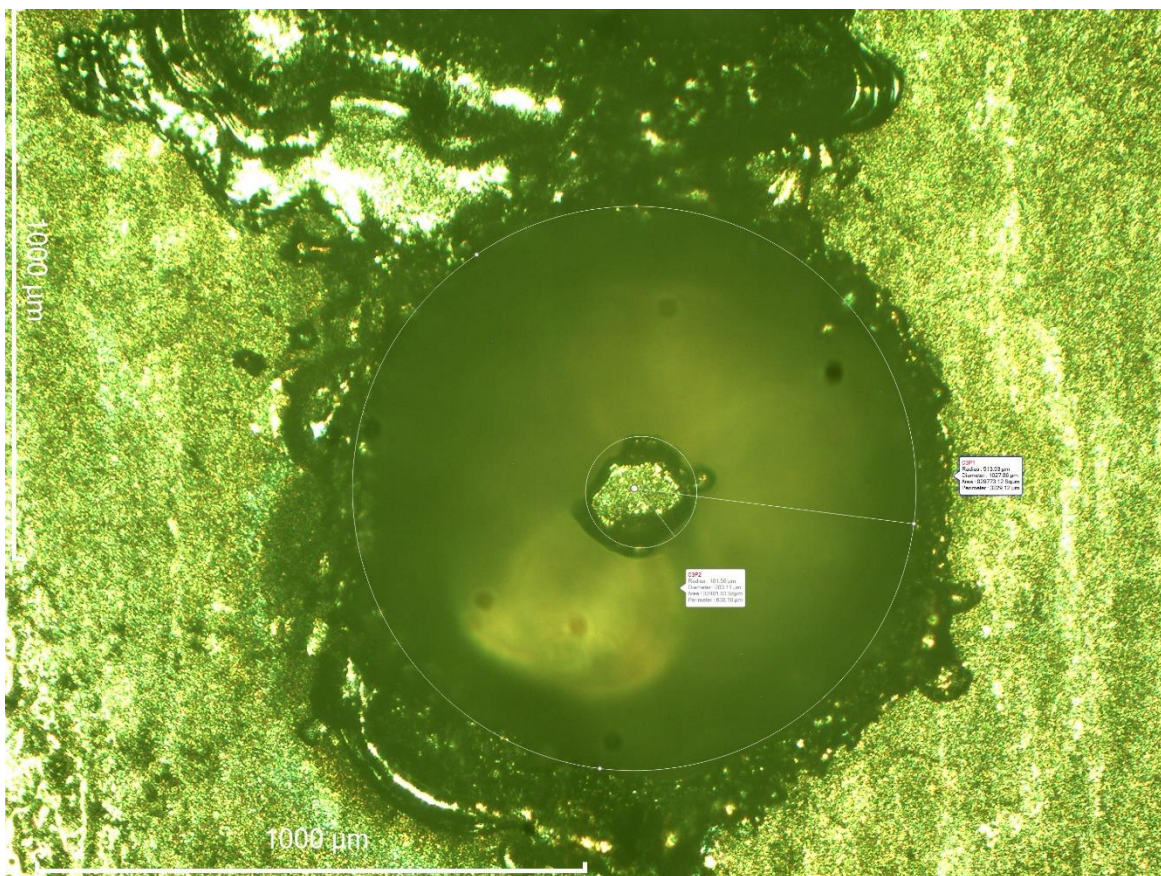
Surface profile is a blind hole after machining 1 mm blind hole
